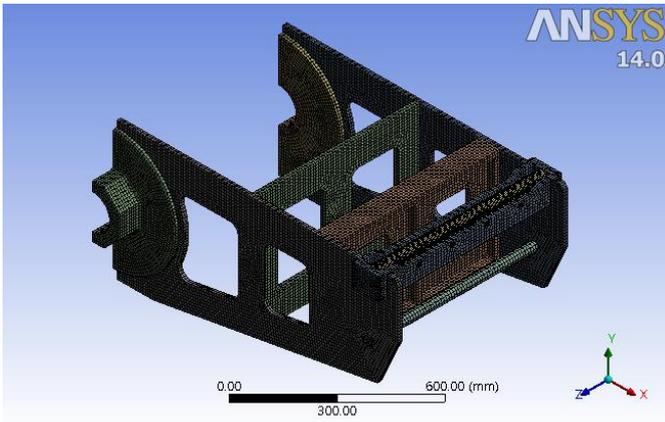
A 3D finite element model of a prototype design of the torque arm.
